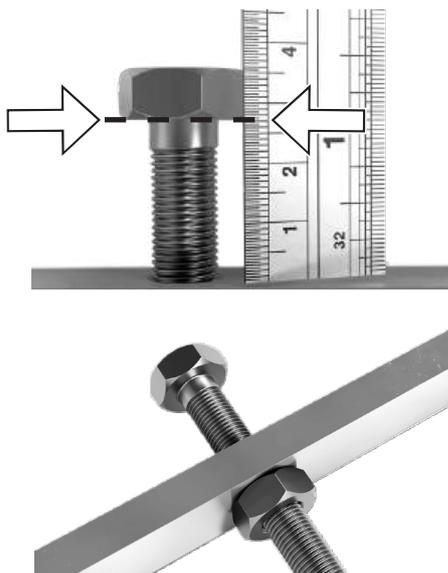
A - Adjust bolt to desired cut height and secure nut (above example set for 27mm)
